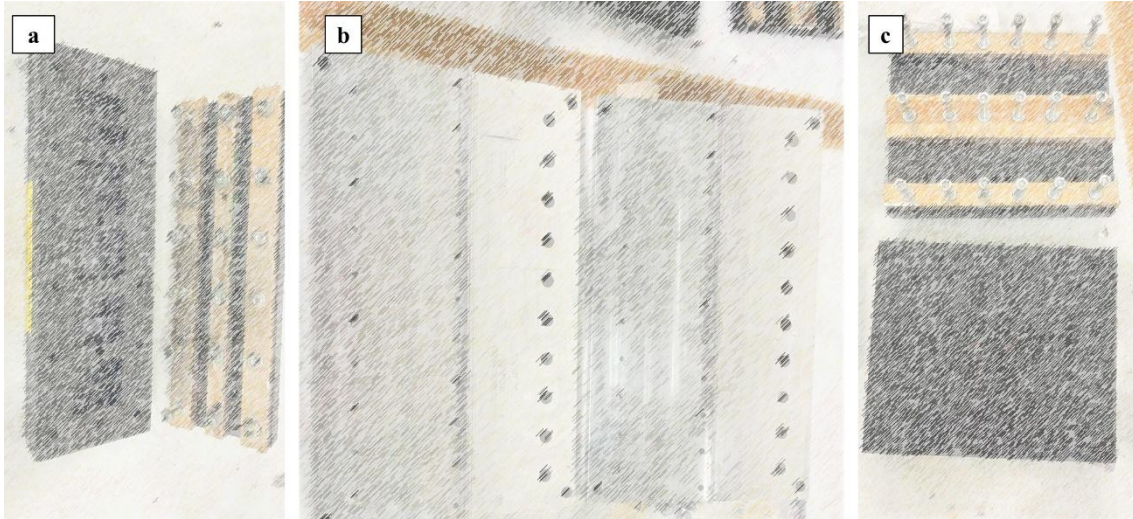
Pictures of some of the custom designed gluing jig to manufacture bulk adhesive specimens where: Mask a) was employed to obtain CT specimens, mask b) was employed to bond TLS and mask c) was used to produce dogbone specimens (certain details are obscured for confidentiality purposes under a Non-Disclosure Agreement).
